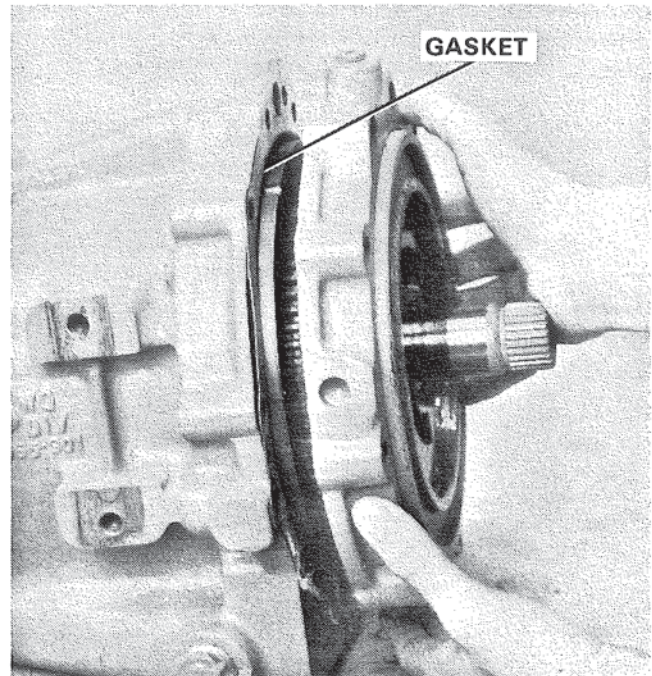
Installing Adapter and Reverse Clutch Assembly and Case.
